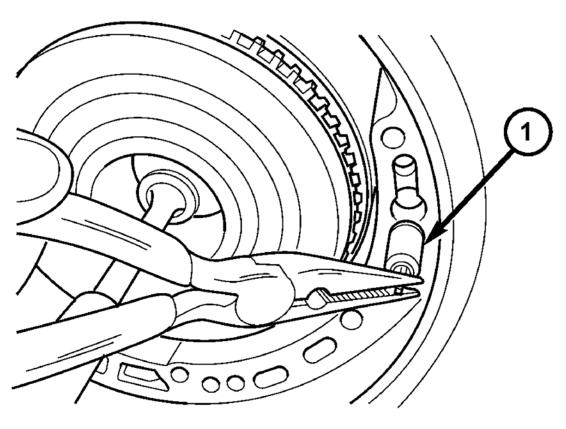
Installing #1 Caged Needle Bearing Courtesy of CHRYSLER LLC
